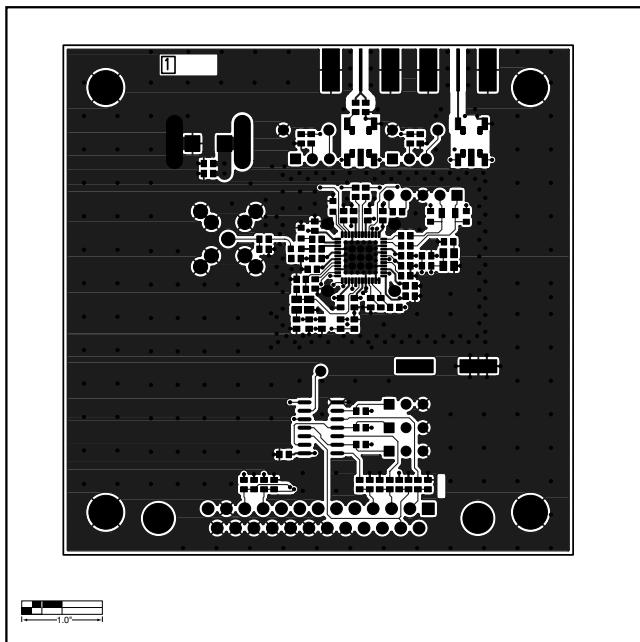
MAX355/MAX357 EV Kit PC Board Layout—Primary Component Side
